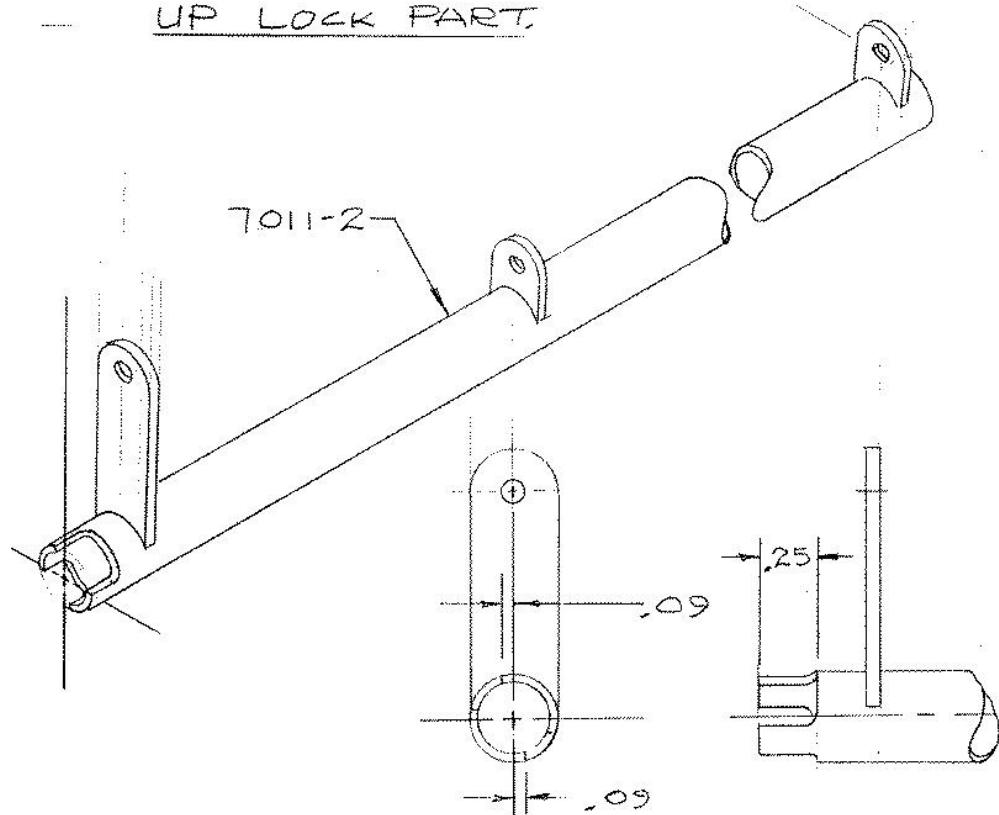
Drawing depicting modifications to p/n 7011-2.
